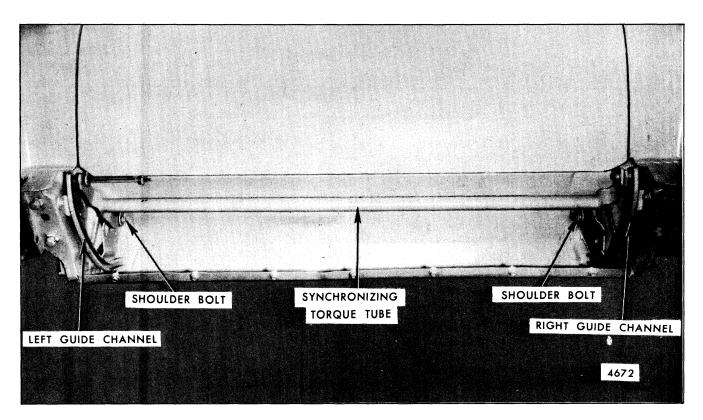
Tail Gate Synchronizing Torque Tube and Guide Channels
